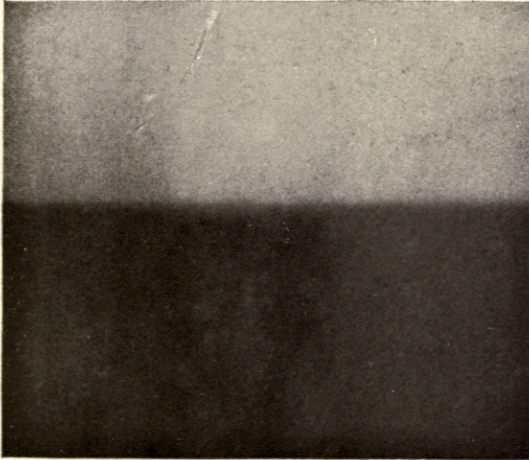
Radiograph of Autogenous Weld in Steel.
